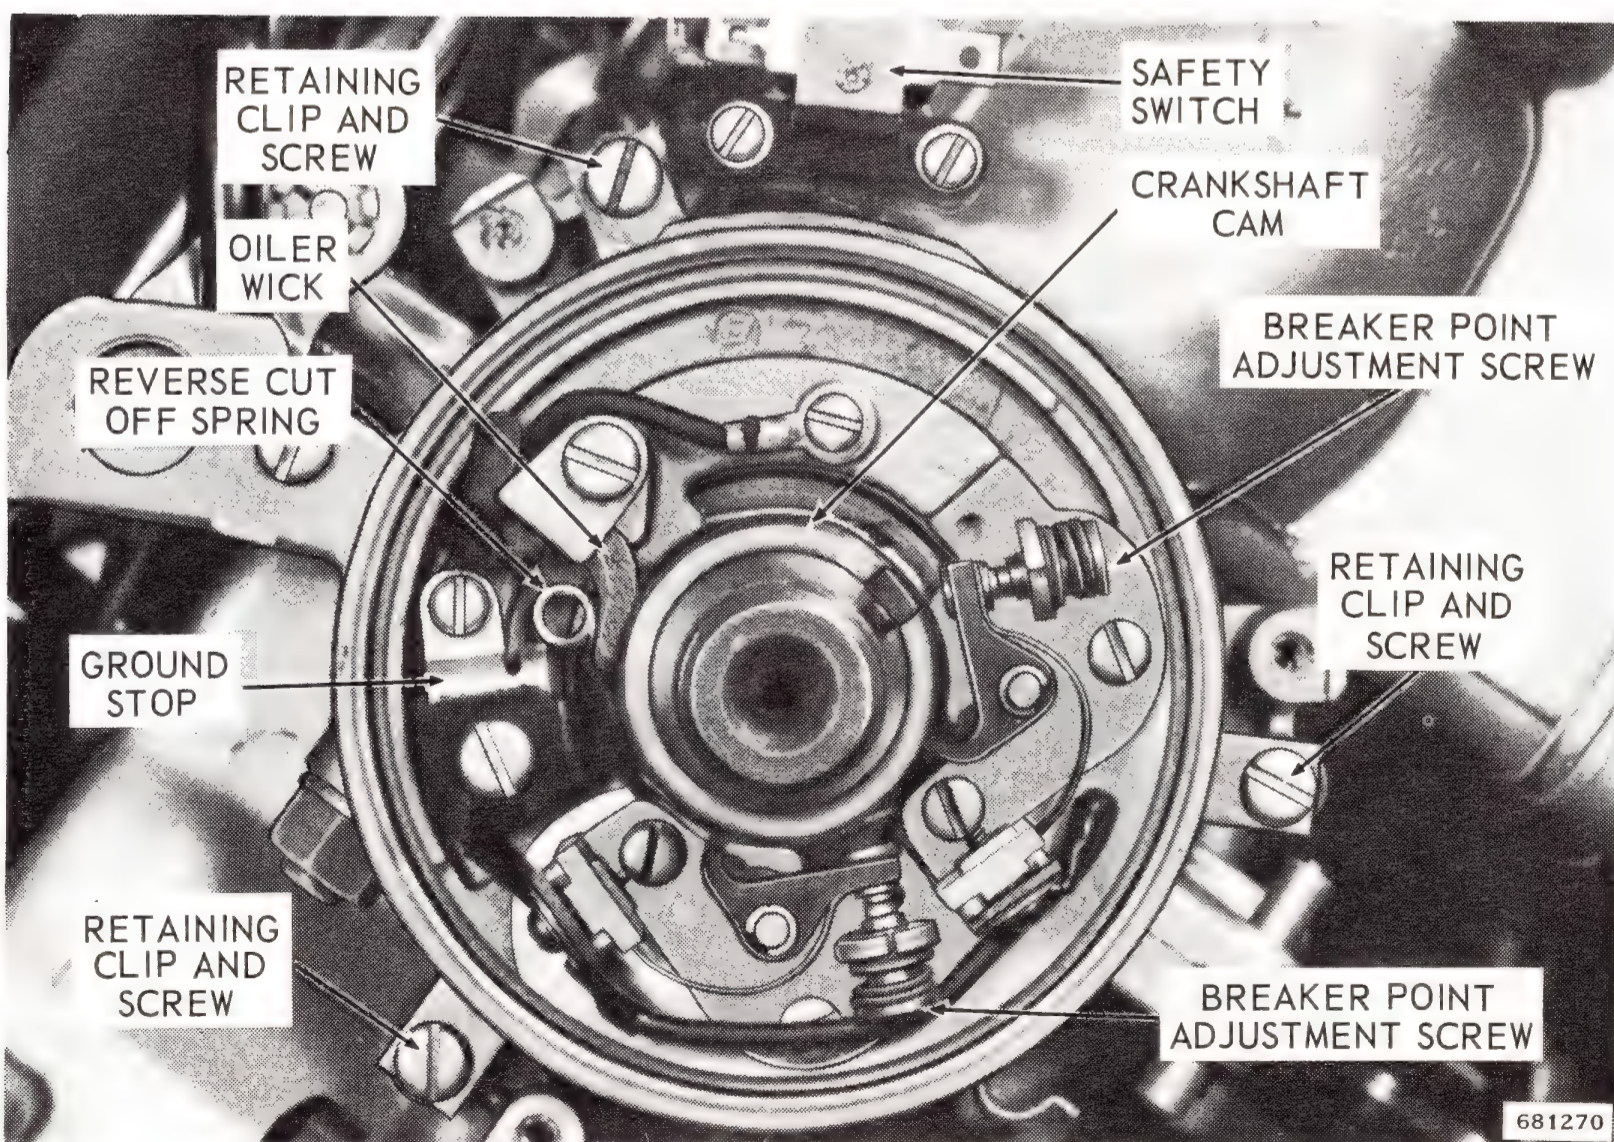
Breaker Type C.D. Ignition - Distributor and Alternator
